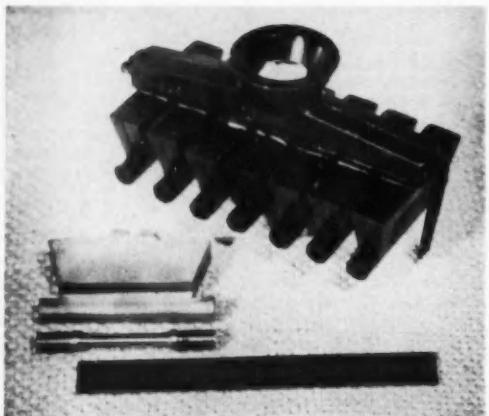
Assembly of keel-bar patterns for the production of a machined test bar. A test-bar coupon and a machined specimen are shown behind the 6-in. rule
